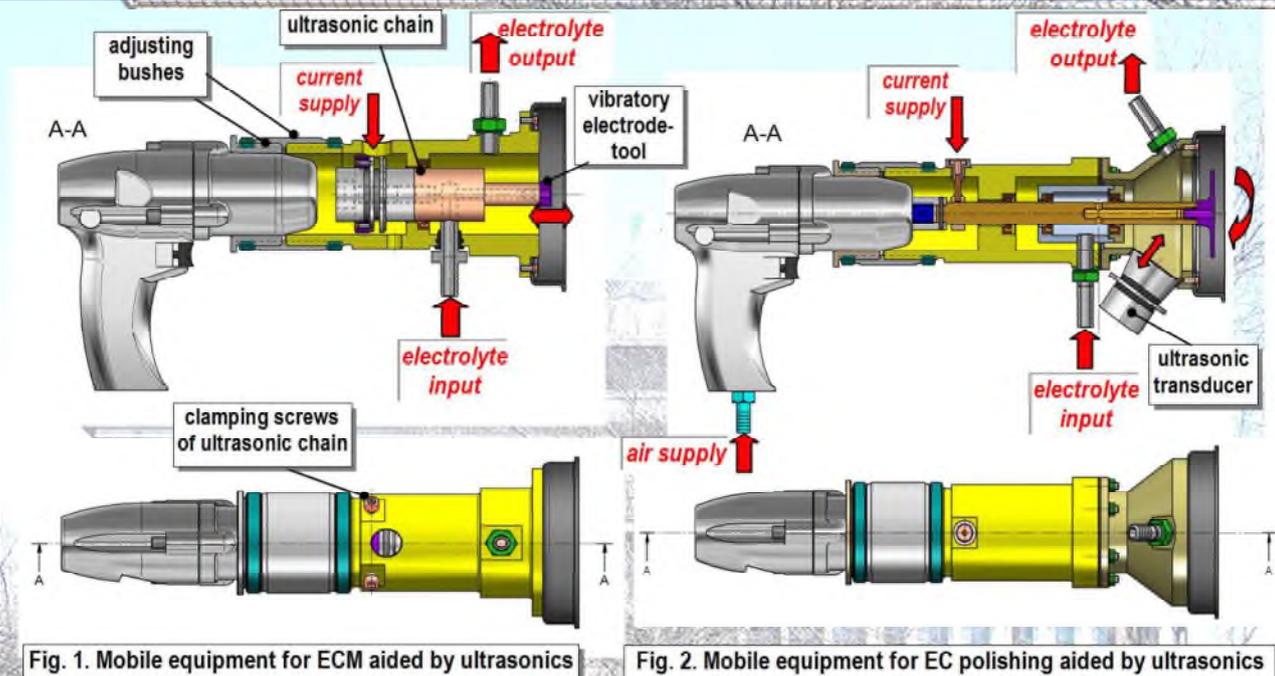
Mobile equipment for ECM aided by ultrasonics
